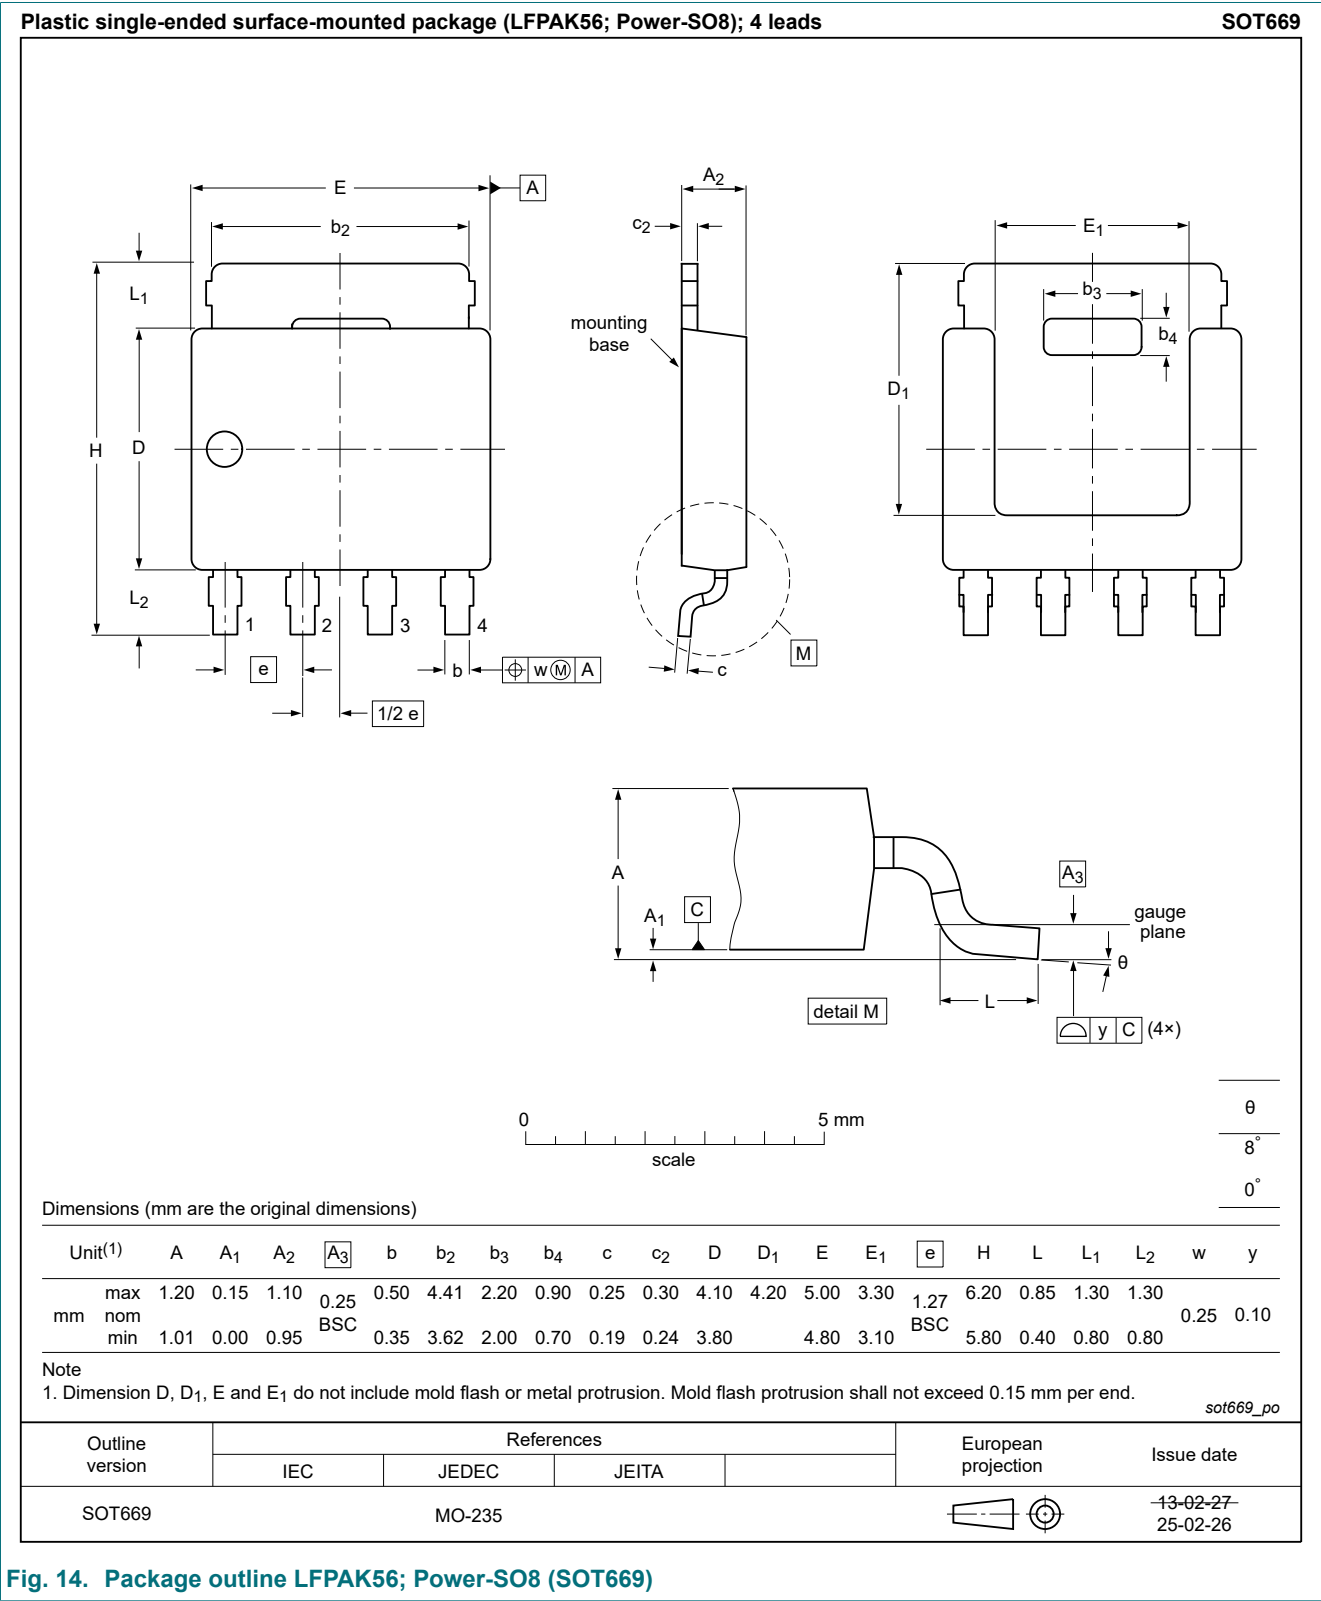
Package outline LFAK56; Power-SO8 (SOT669)
